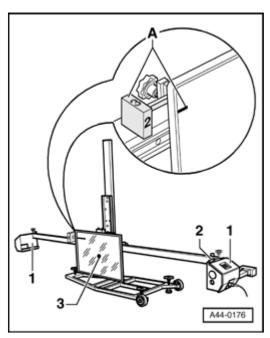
Attaching Measurement Pick-Ups For Front Wheels On VAS 6190 Courtesy of VOLKSWAGEN UNITED STATES, INC.
